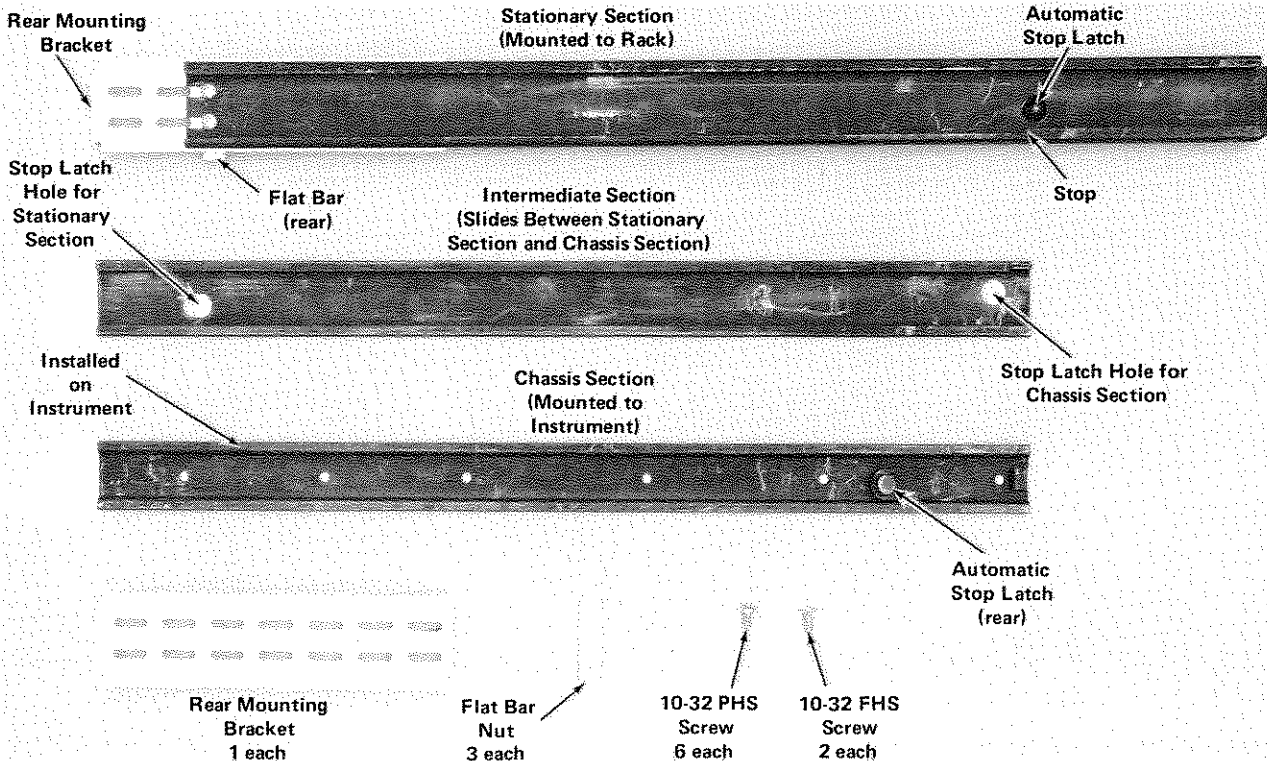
Slide-out track assemblies and small hardware components for mounting the stationary section to the rack rails.
